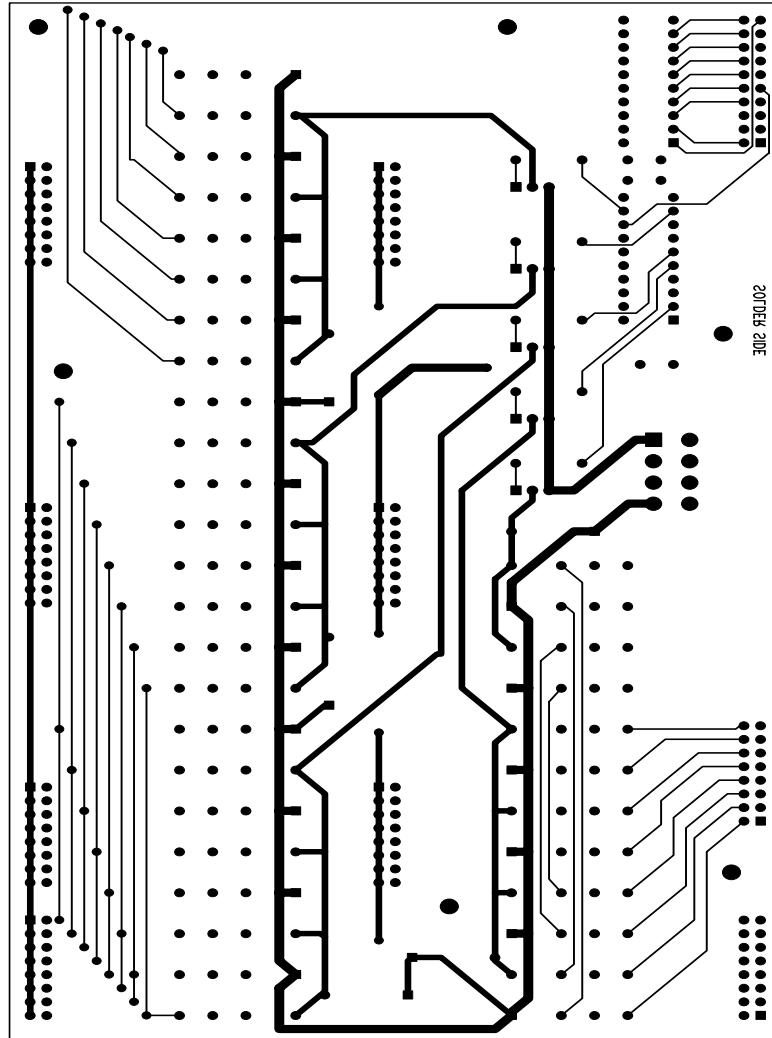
Audio bus switcher/combiner PCB, solder-side routing.
